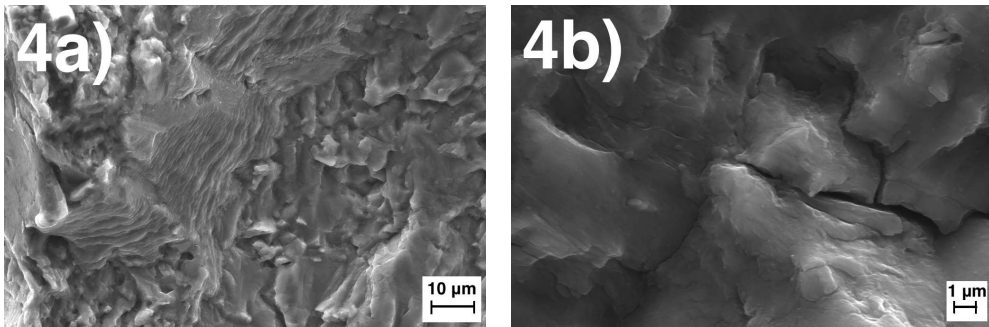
Striations and secondary cracks on the fractured surface of the welded and shot peened AA6082.50-T6.
